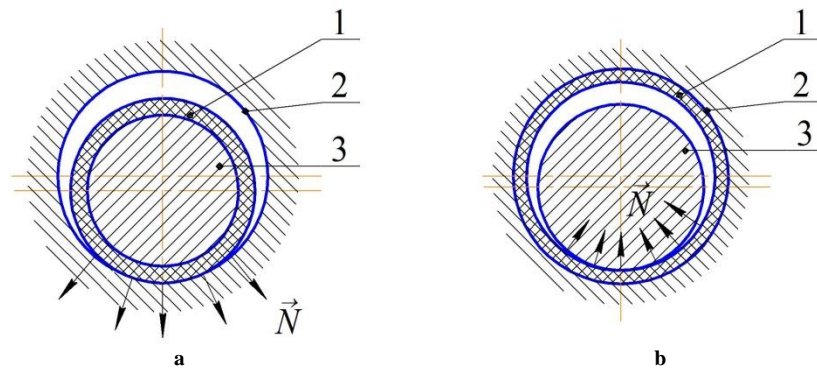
Schemes of reverse (a) and forward (b) tribocoupling of parts: 1 – layer of PC or PCC; 2 – sleeve; 3 - shaft.
